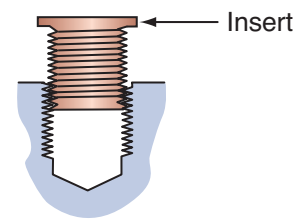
Solid-threaded inserts are widely used when repairing threads in a component.
